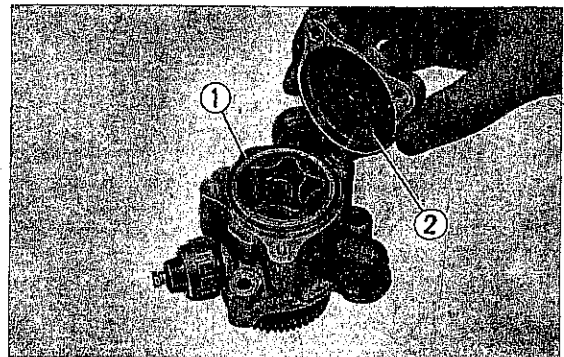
① 47 mm O-ring ② Oil pump cover
